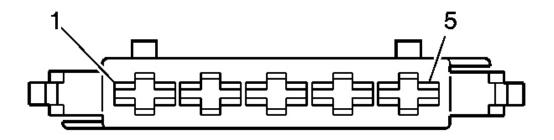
HVAC Control Module C1 Connector End Views Courtesy of GENERAL MOTORS CORP.
